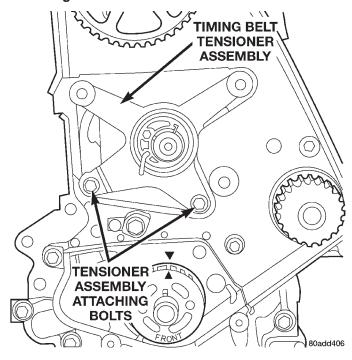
Timing Belt Tensioner Assembly—Removal/ Installation
